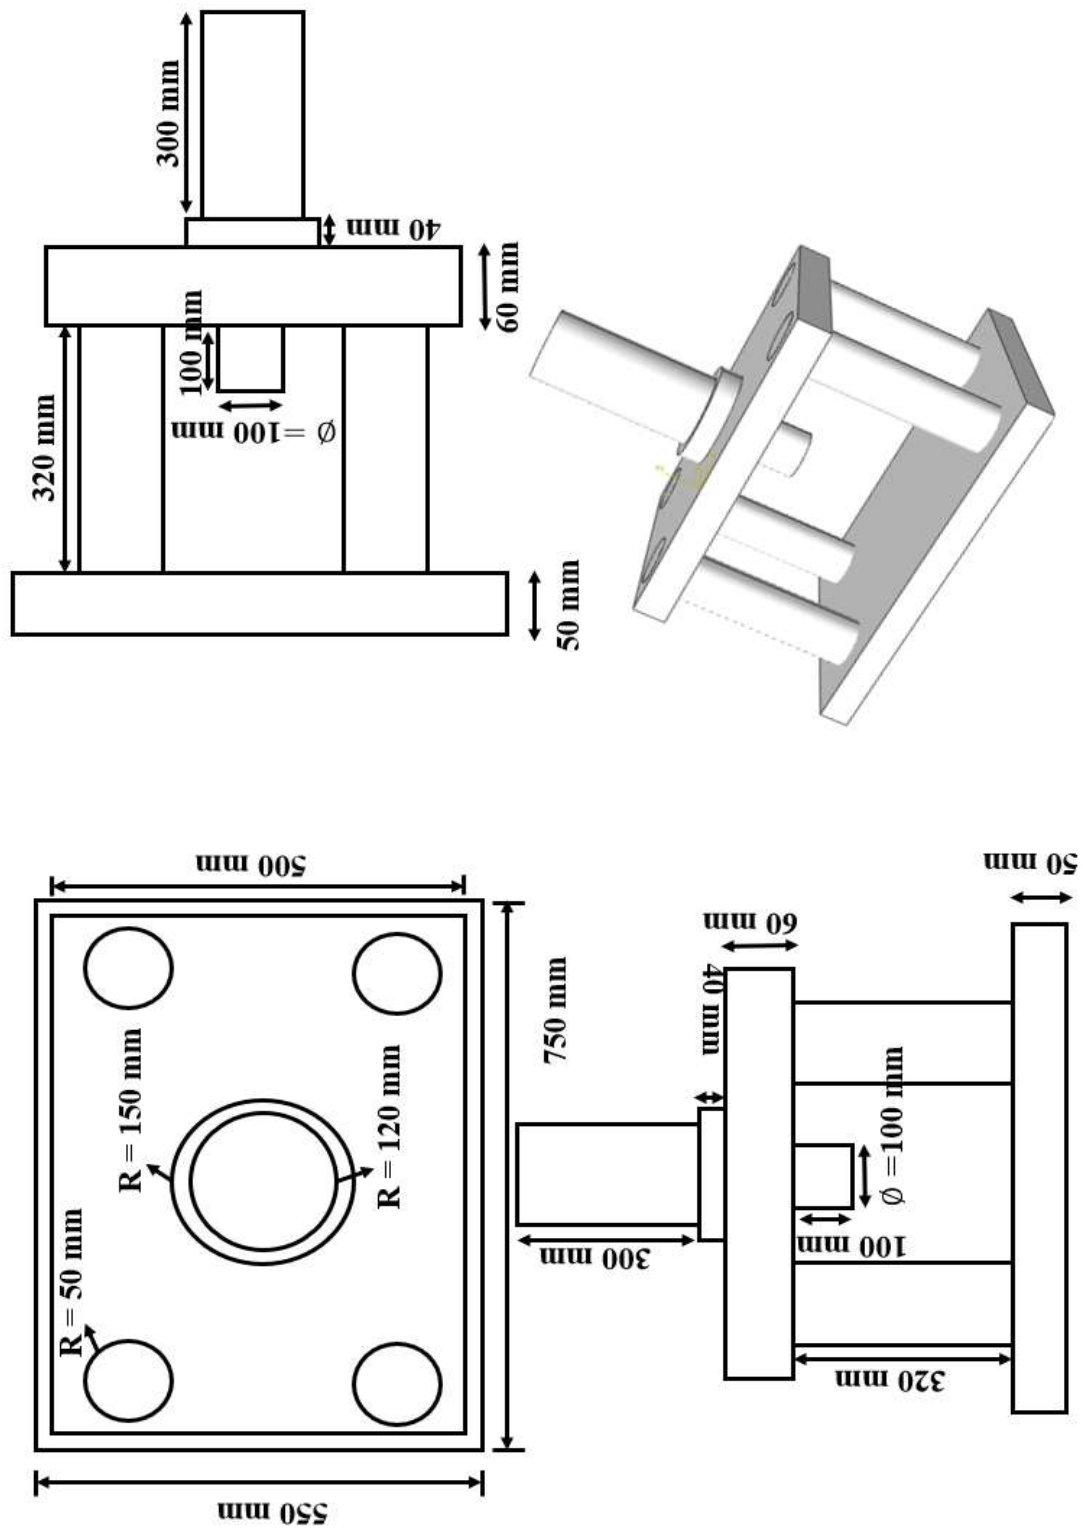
Drawing detail of assembly of upper cylinder with top and bottom supporting plate connected to pillars
